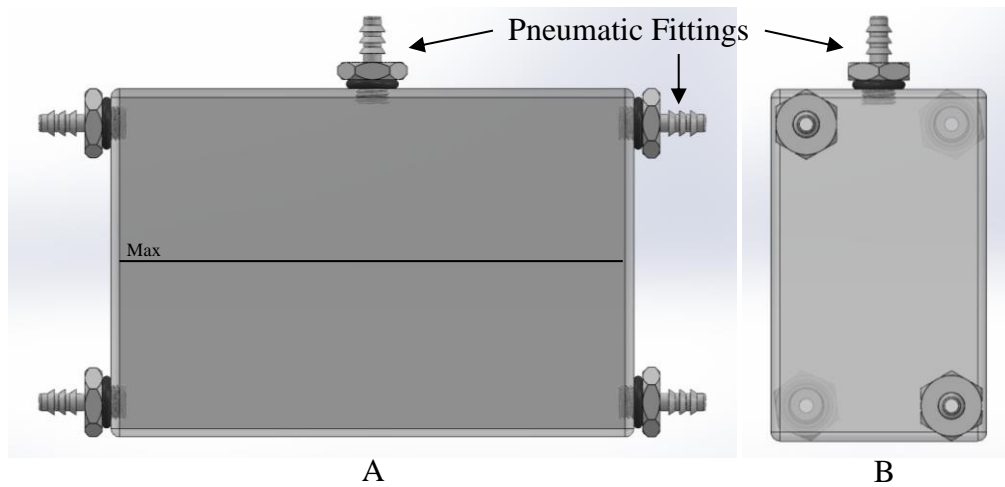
7: Front Elevation (A), End Elevation (B) of the Gas Separator Unit
